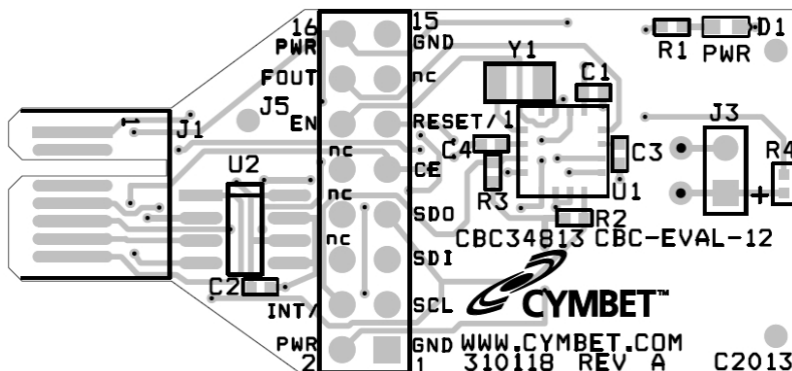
CBC-EVAL-12-34813 EnerChip RTC Board Assembly Diagram (Top View).
